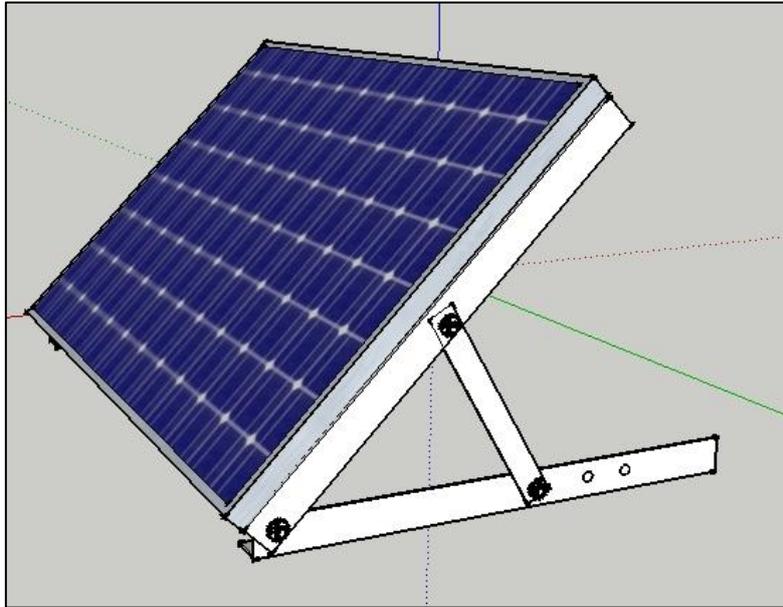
Fixed Angled Solar Panel 3D drawing from right side
